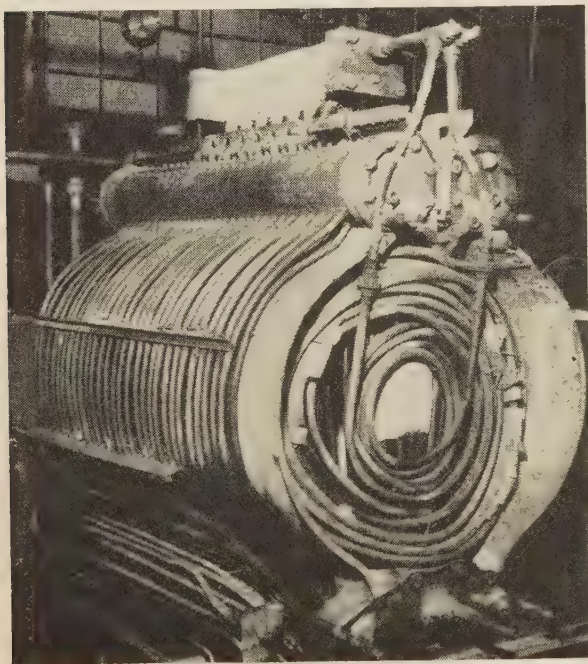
VIEW OF BOILER WITH OUTER JACKETS REMOVED
